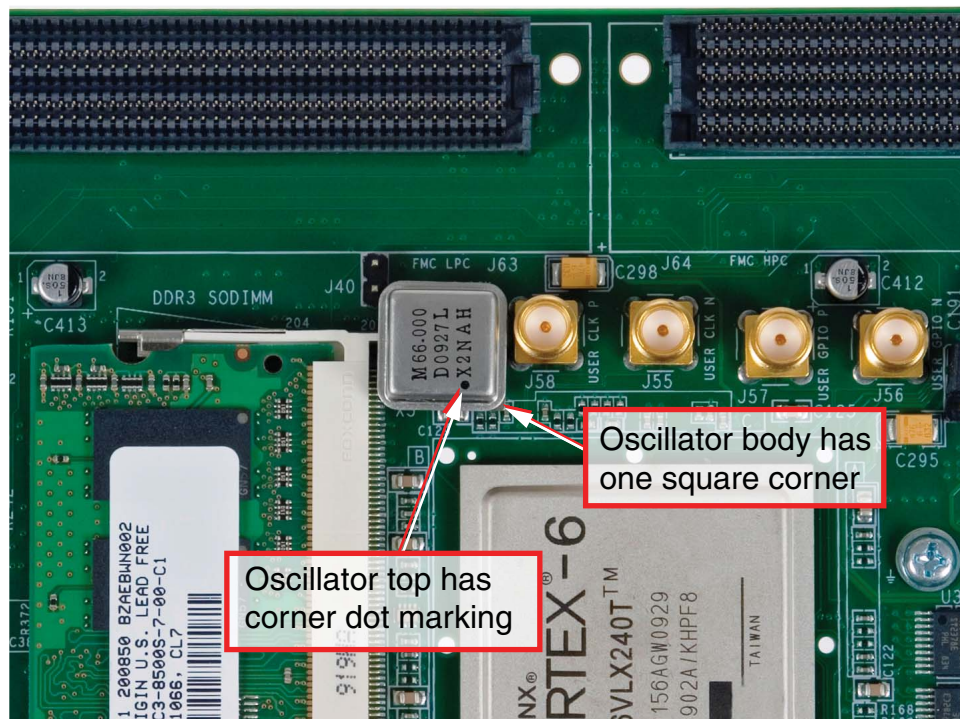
ML605 Oscillator Socket Pin 1 Location Identifiers
